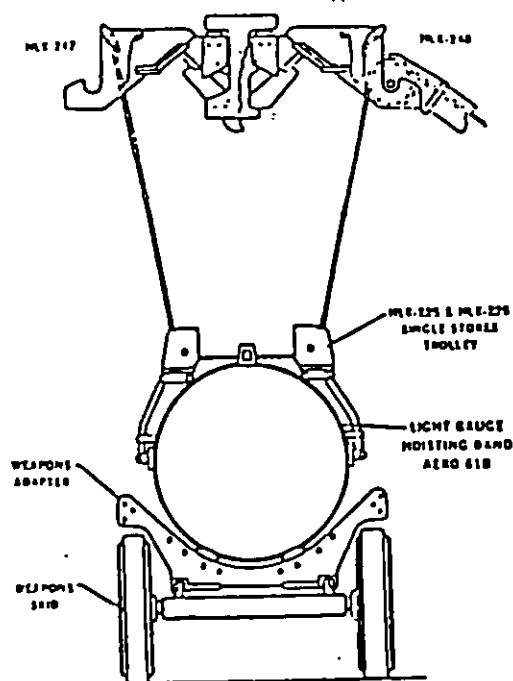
General arrangement for loading single store with multiple position hoist adapters.
